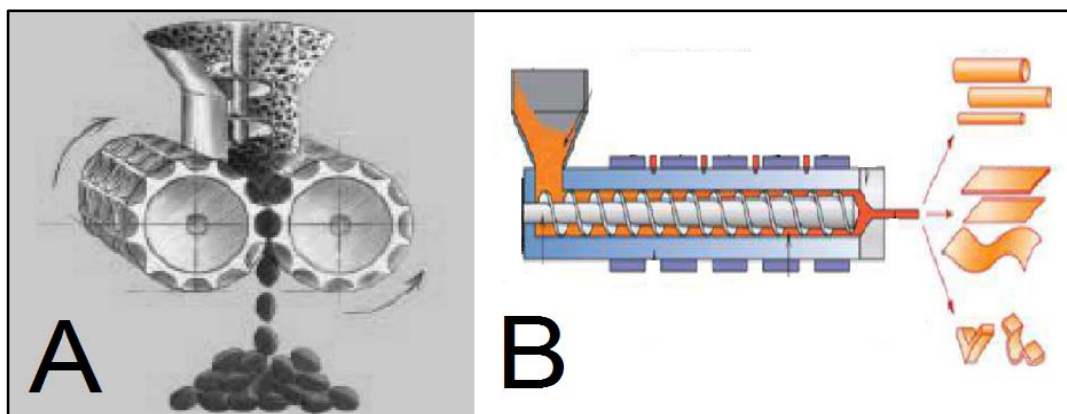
Diagram of forming machines: (A) briquette machine; (B) extruder (Adapted from [22] and [23]).
